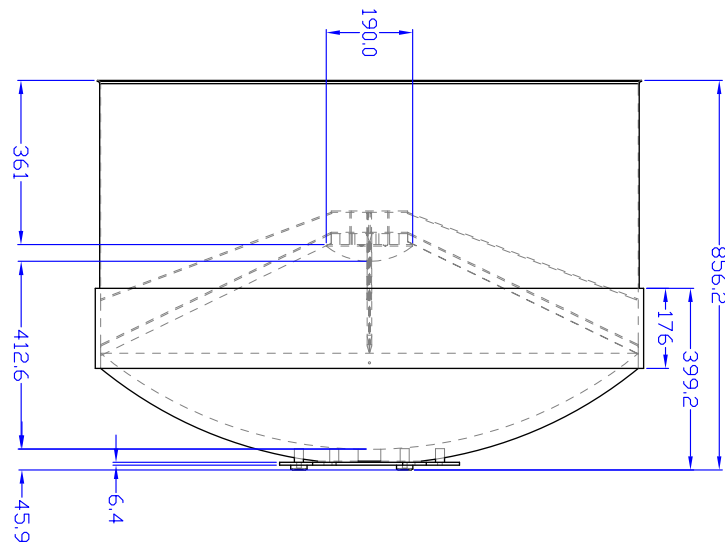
Drawing of the assembled antenna including the main components: primary and secondary mirror, structure and shield baffle, quadripod support legs and hexagonal bottom support plate. The units are in mm.
